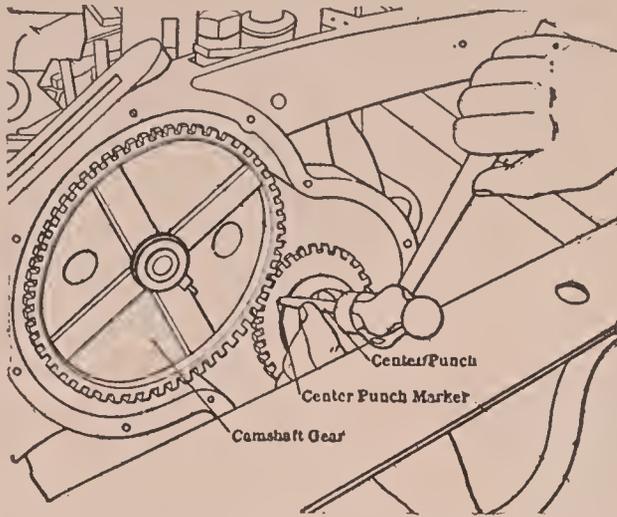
Method of marking the timing gears with a prick punch so that the relations, one to another, may be preserved.
